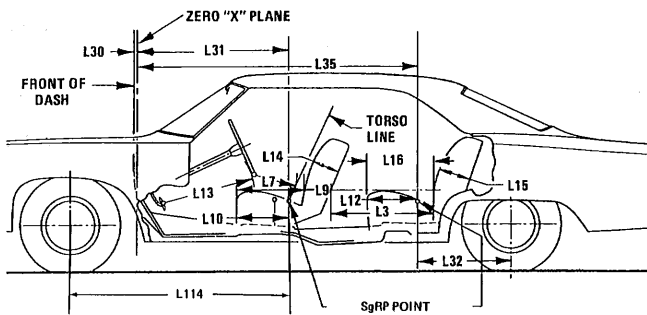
INTERIOR DIMENSIONS, LENGTH
